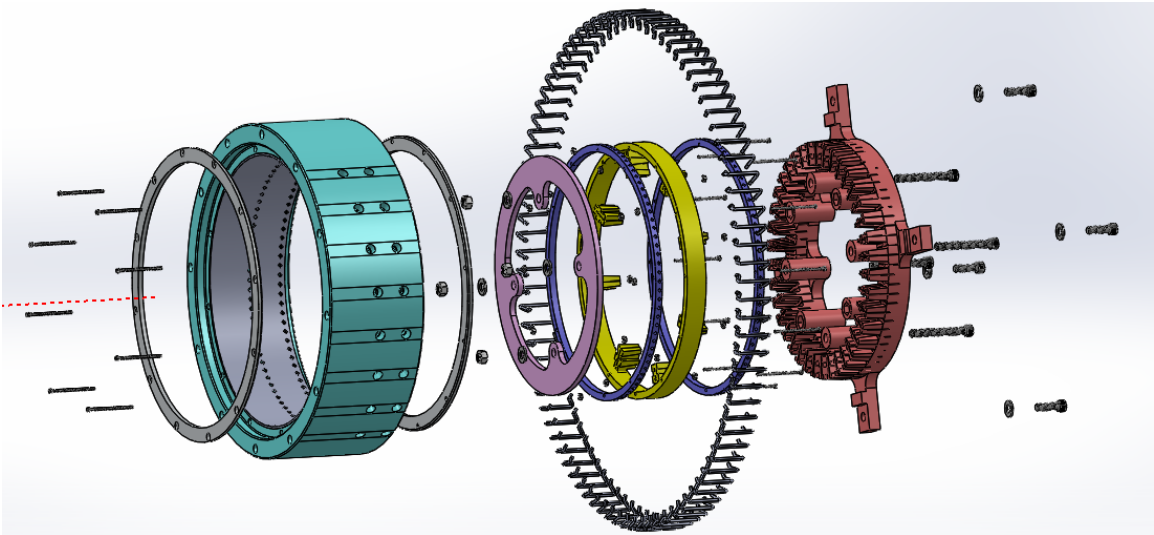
Exploded View of the Internal Passage Casing Treatment Process
